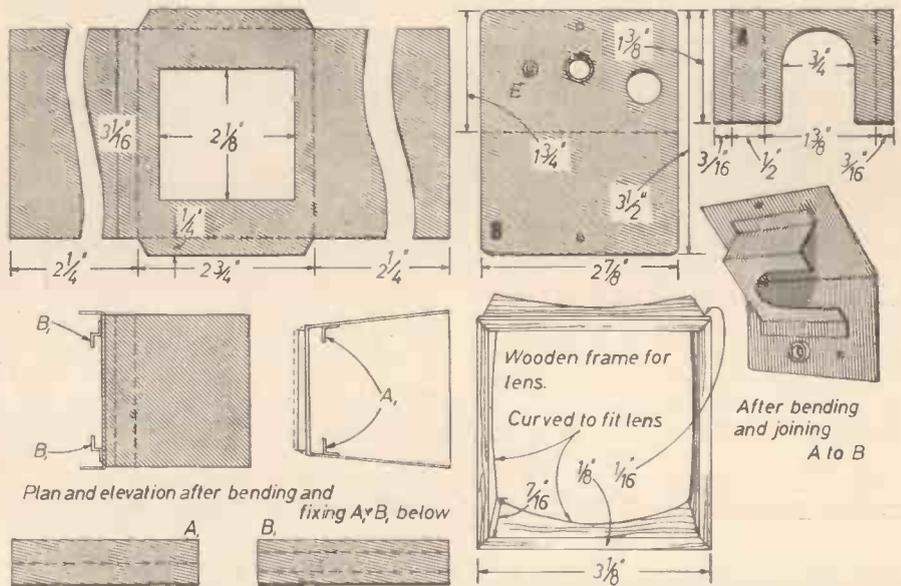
Slide and diffuser holder, lampholder and switch plate and lens securing frame.
